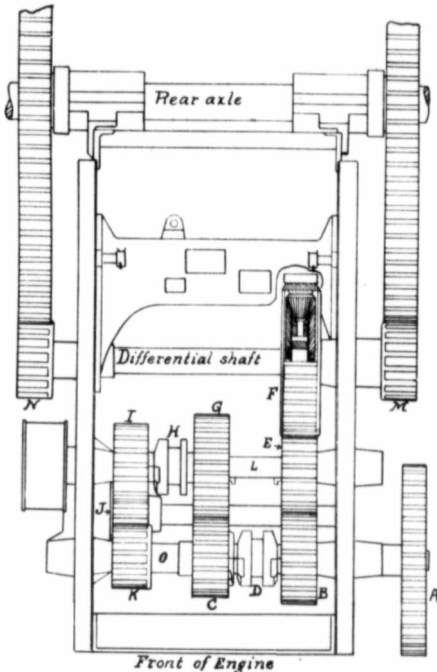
Plan View of Imperial Tractor, built by Imperial Machinery Co.
